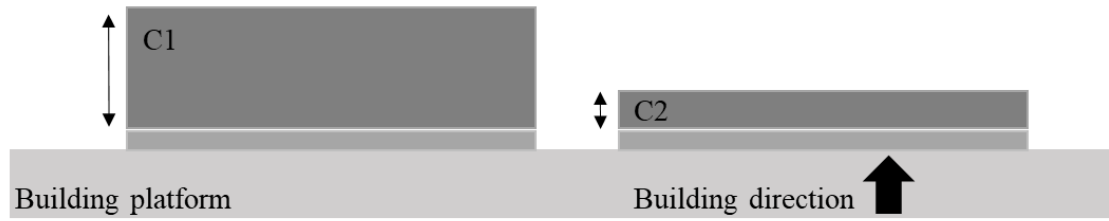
Schematic of test samples C1 and C2 on the building platform.
